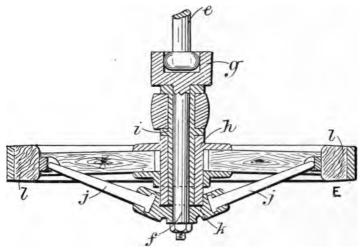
De Dion and Bouton steam omnibus. Horizontal section of wheel.
